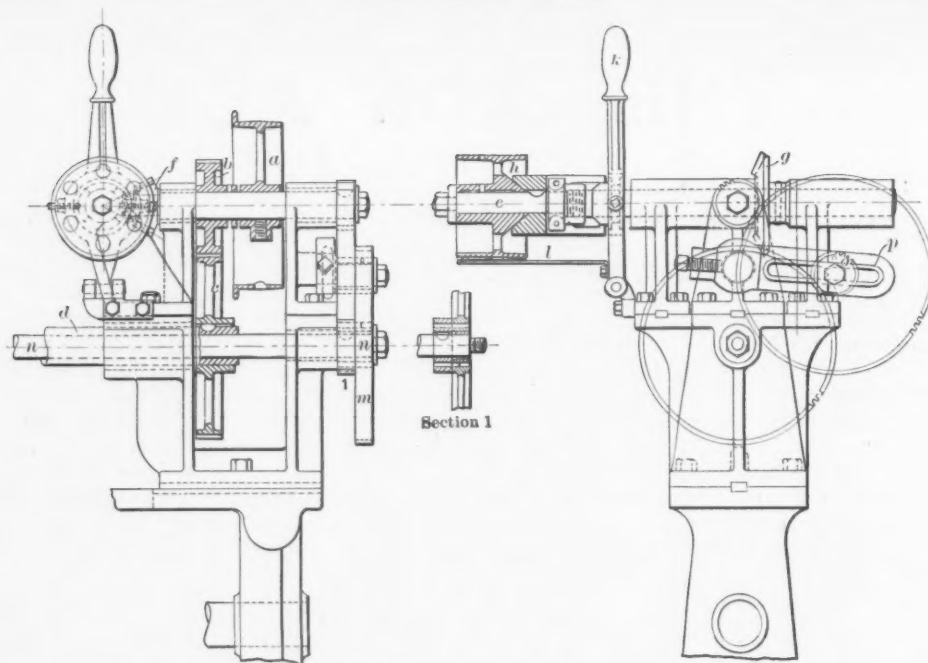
Detail of the Drive of the Improved Universal Screw Machine.
